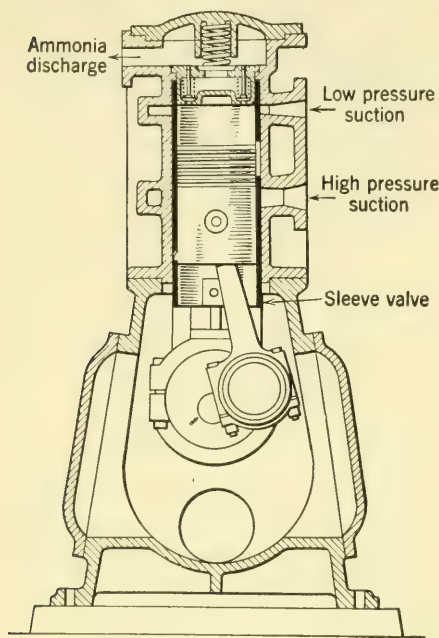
The West Sleeve Type [mechanically operated] Ammonia Compressor.
